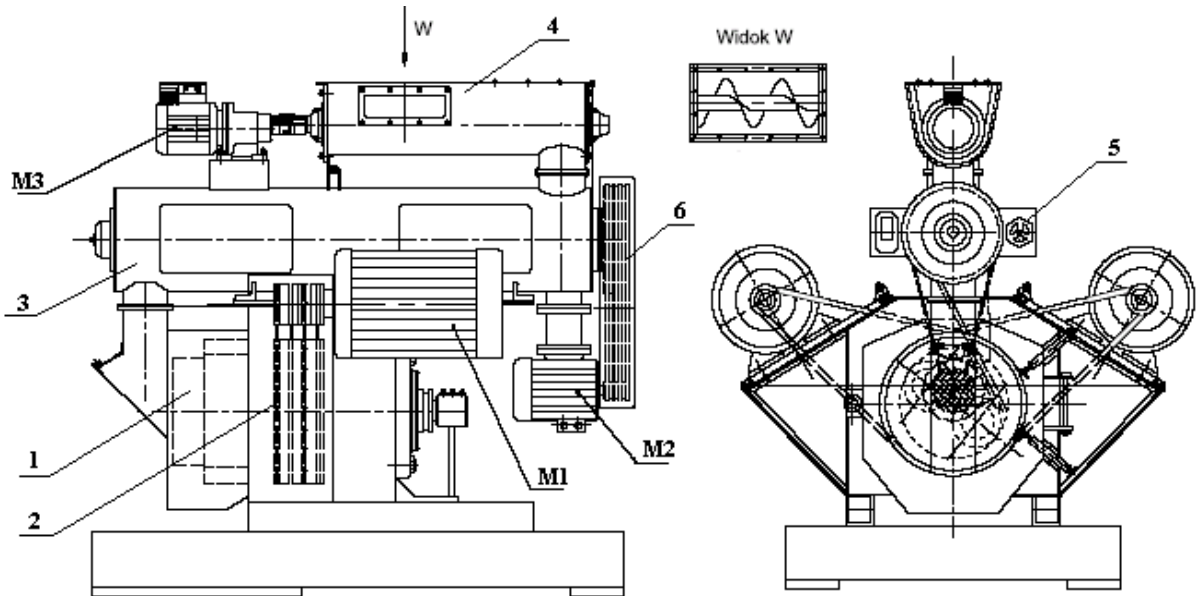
Scheme of PD-15 type pellet mills with two Testmer motors [Testmer Catalogue]: 1-working system of the pellet mill, 2-belt gear transmitting drive from motors M1 to the shaft of the pellet mill, 3-conditioner, 4-feeder, 5-system of steam application to the conditioner, 6-belt gear transmitting drive from motor M2 to the shaft of the conditioner, M3 – electric motor driving the feeder [7]
